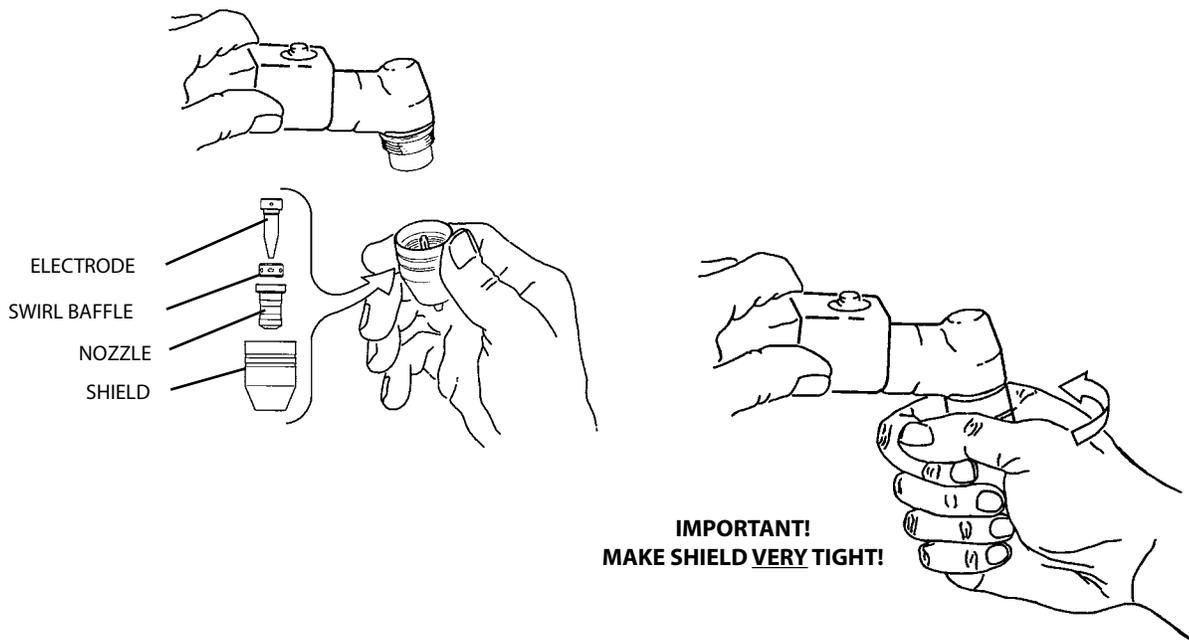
Assembly of PT-27 Torch Front End Parts
